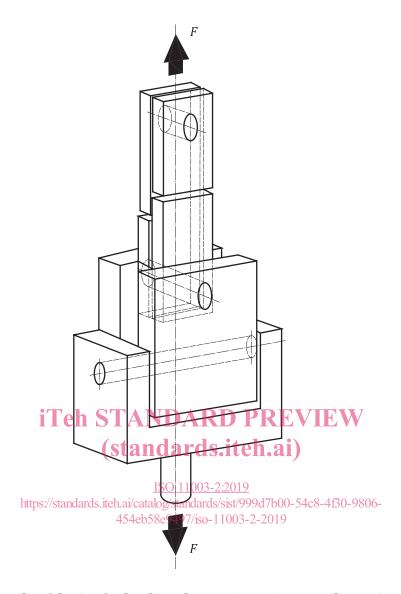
Example of device for loading the specimen in a tensile-testing machine
